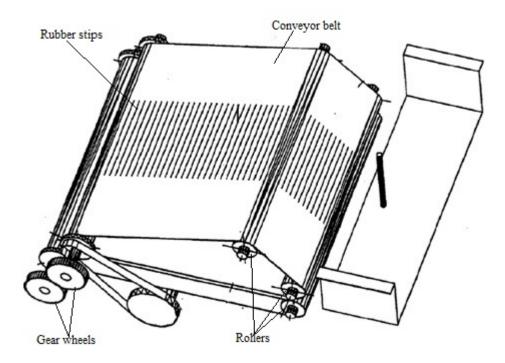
Bag dispensing machine for upward dispensing [8]
